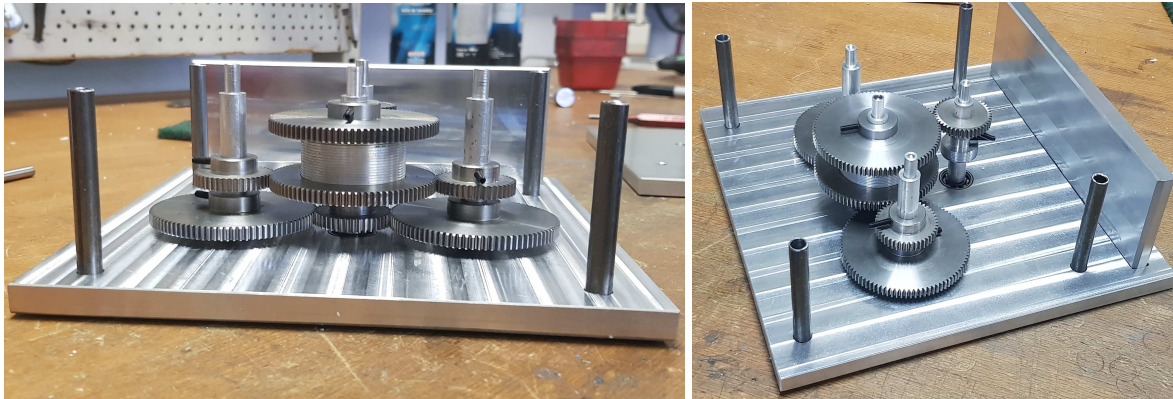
Assembly of the manufactured moving-platform of the CDPC
